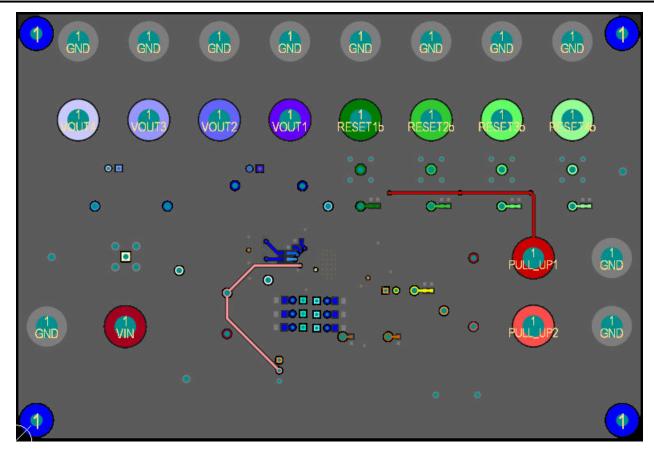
Printed Circuit Board Layout Example: Bottom Layer
